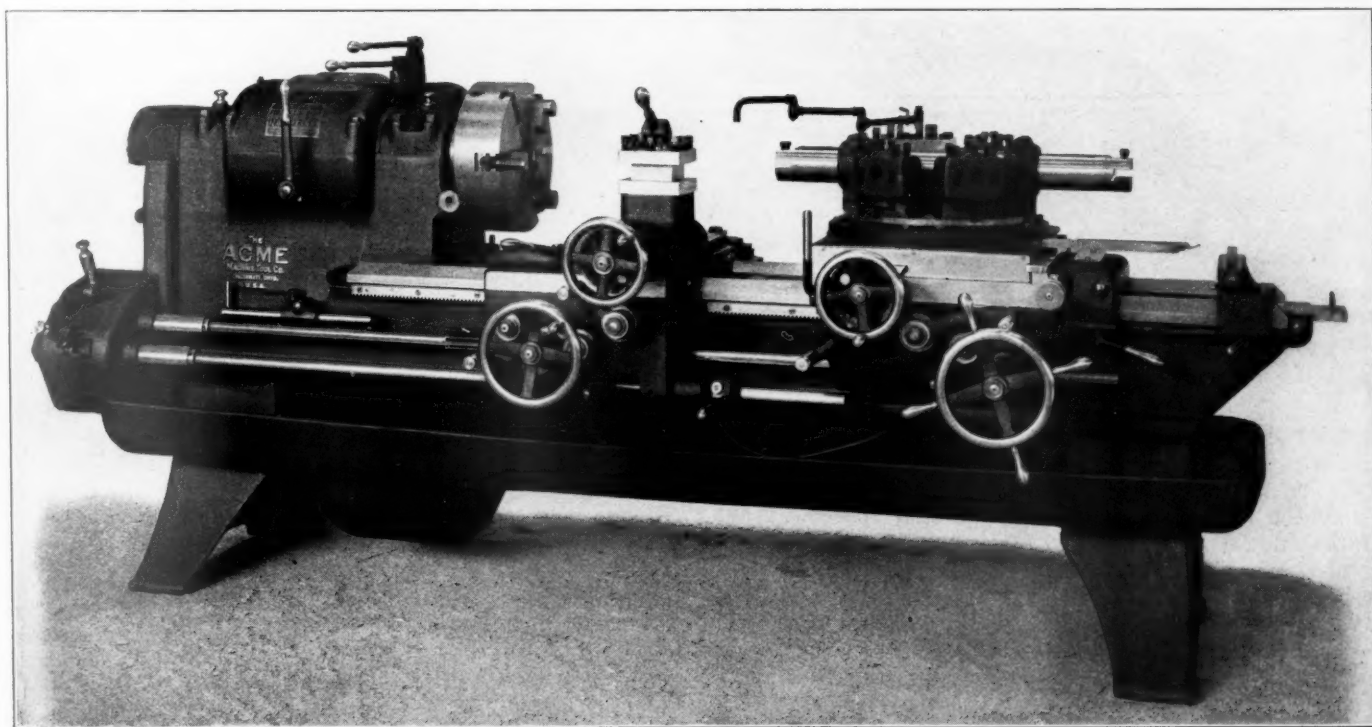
Cincinnati Acme No. 3 Universal Flat Turret Lathe
